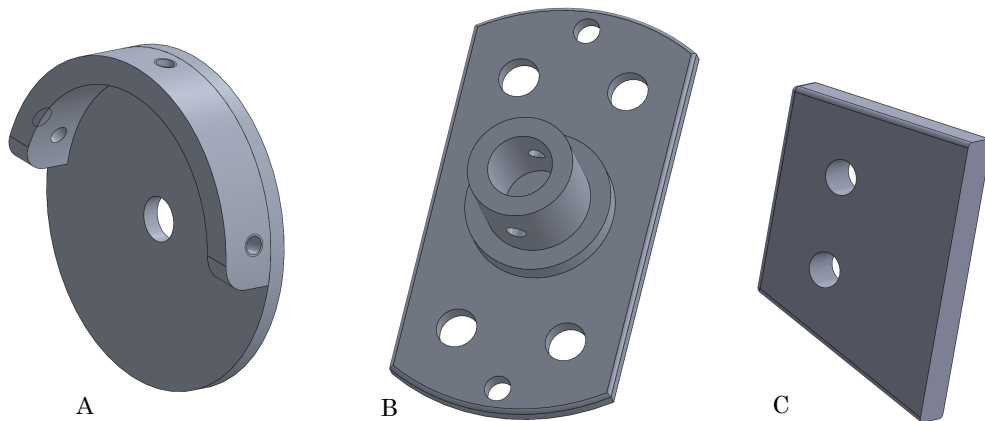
A: Thrust cell holder. B: Motor bracket with welded hub for shaft mounting. C: Torque cell bracket with two M8 tapped holes.
